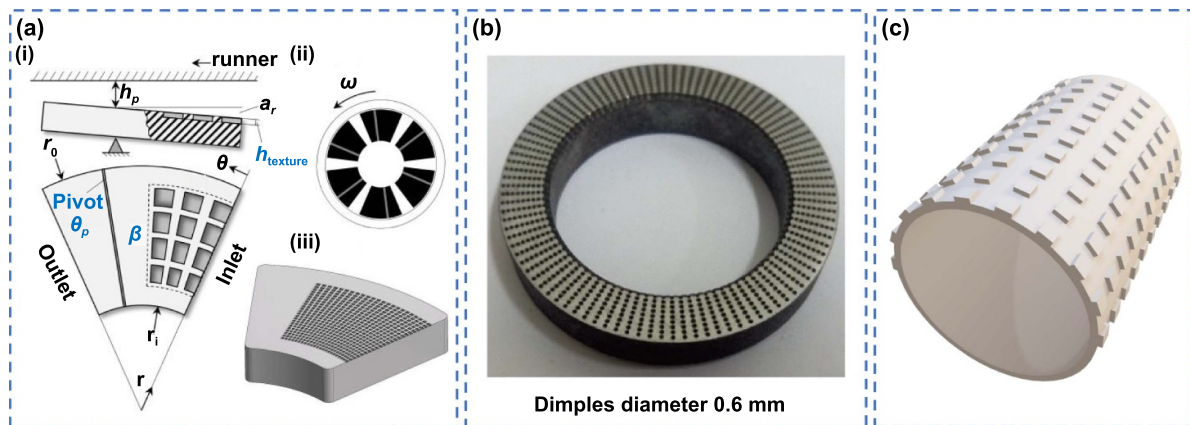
Bearing. (a) Tilting pad thrust bearing. (i) Pad details with the coordinate system. (ii) Tilting pad thrust bearing geometry. (iii) Exemplary microtexture pattern. Reproduced from [50]. CC BY 4.0. (b) Microtextured bearing. Reproduced from [277], with permission from Springer Nature. (c) Microtextured hydrostatic bearing.
